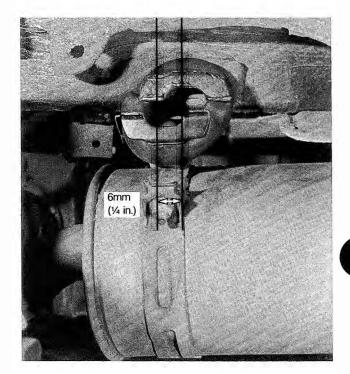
Rear muffler retaining ring preload. Preload shown has been exaggerated for clarity.
